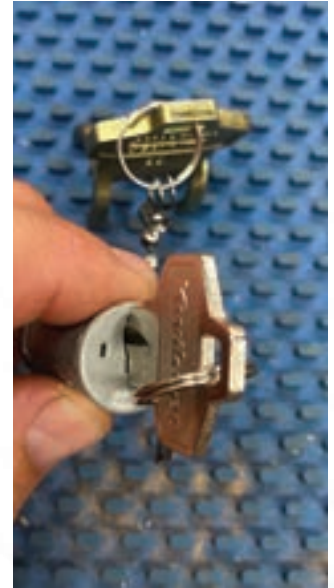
The SC1 key blank is fully inserted into the cylinder.
